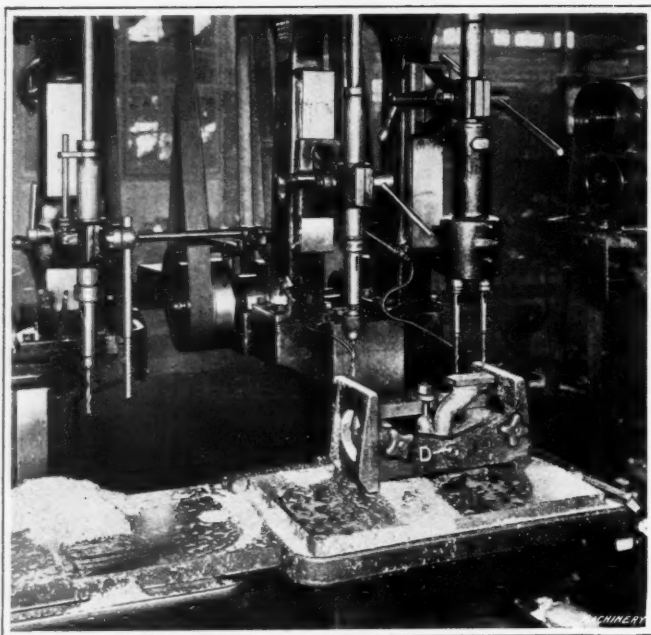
"Avey" Two-spindle Drill Presses and Sellow Drill Head for drilling All Holes in Intake Manifolds without requiring Work to be reset in Fixture
